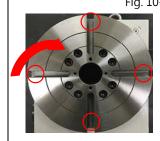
Adjust backlash on the circumference of rotary table at 90 degrees intervals as Fig. 10-1. Repeat step 5-step 10 until the alignment is in the regulation. (0.005mm-0.01mm)
